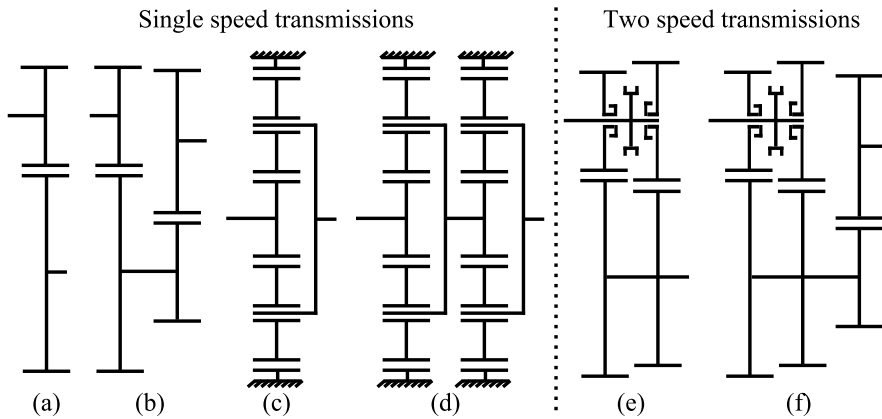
PLACE HOLDER Transmission layouts included in the present work: (a) offset gear (b) double stage offset gear (c) planetary gear (d) double stage planetary gear (e) two speed transmission (f) two speed transmission without output reduction gear.
